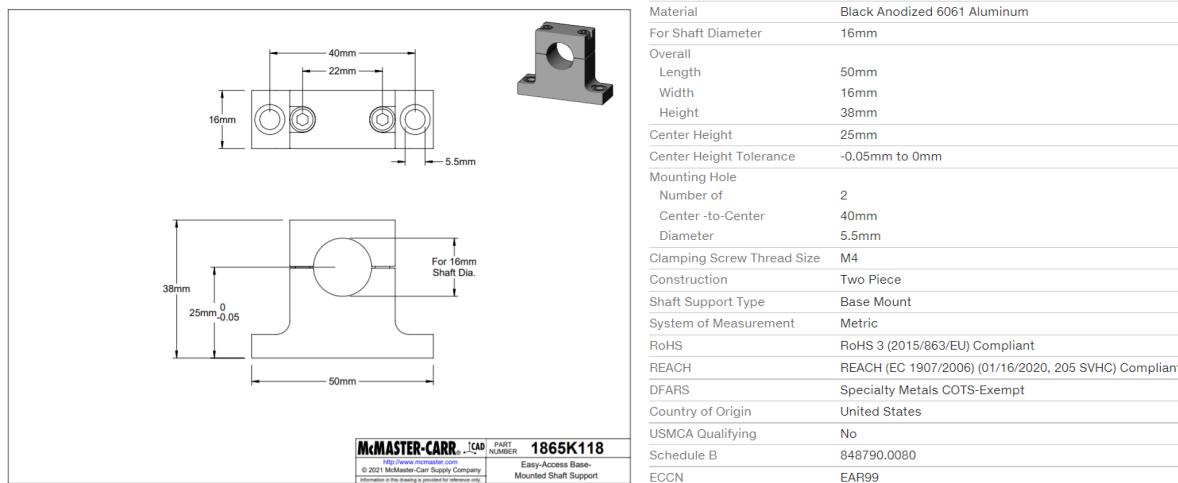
Easy-Access Base-Mounted Shaft Support 1865K118 [23]
